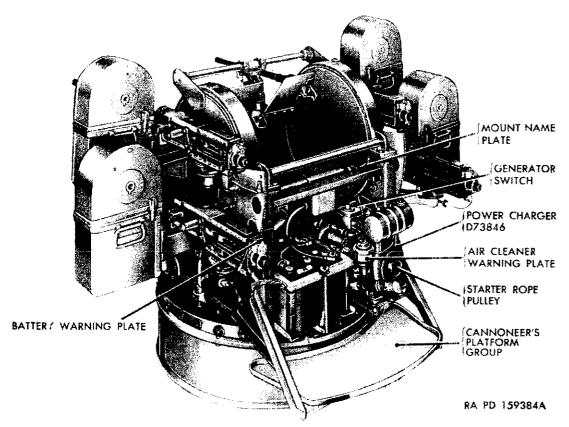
Multiple cal ..50 machine gun mount M45D-rear view.
